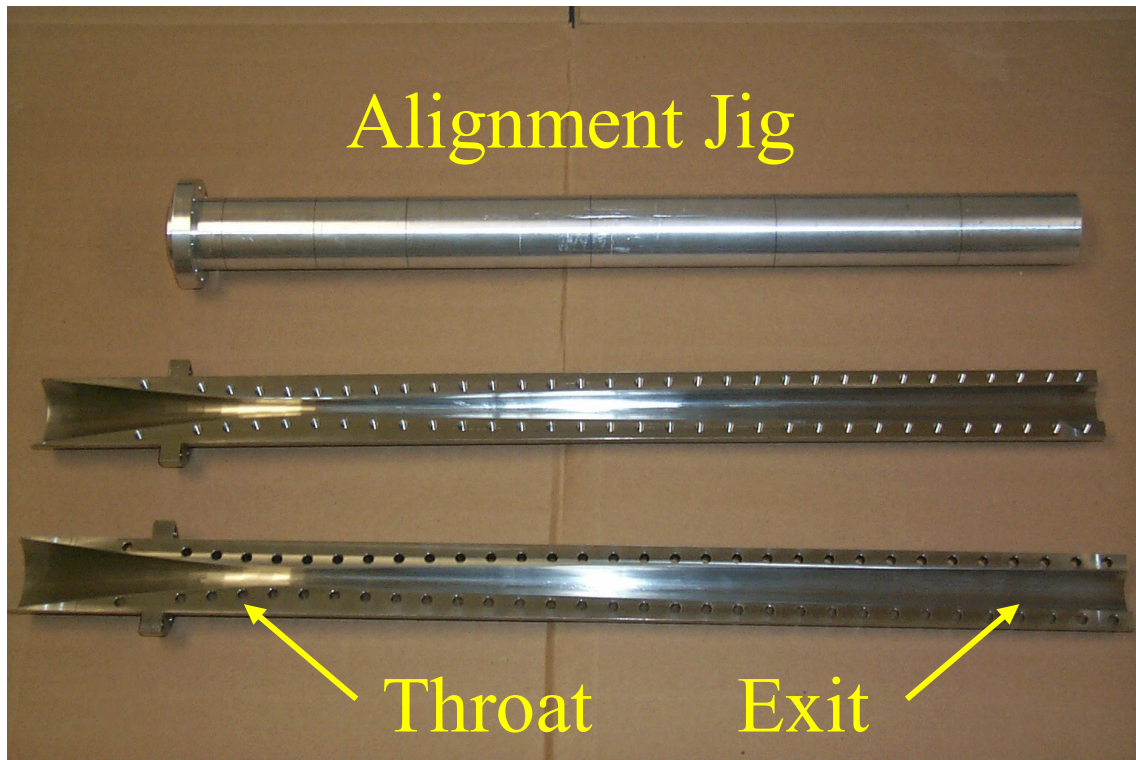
A1: The two halves of the nozzle are shown together with an alignment jig used during the construction of the magnet nozzle assembly.
